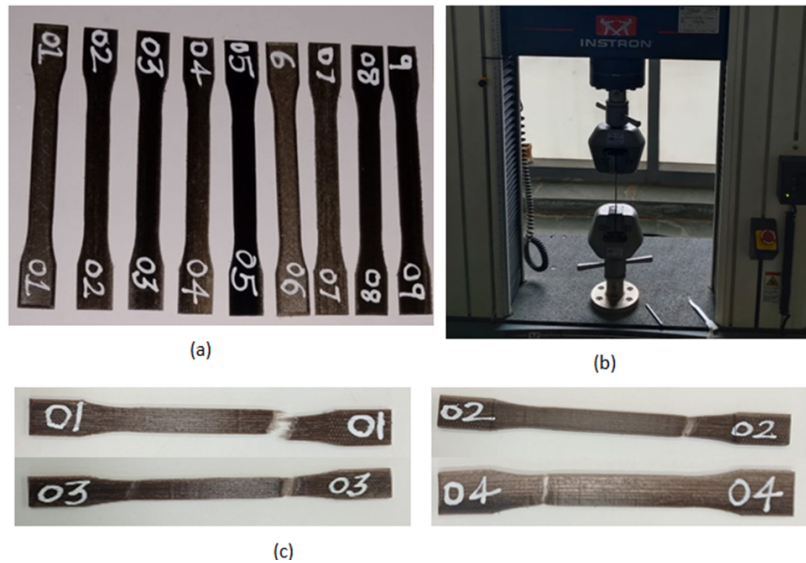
(a) Fabricated tensile test specimens, (b) Tensile testing of 3D-printed specimens, (c) Fractured tensile test specimen.
